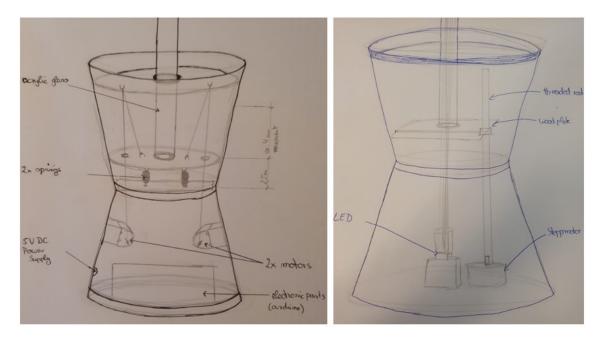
Left: New design with motors, Right: New design with stepper motors
